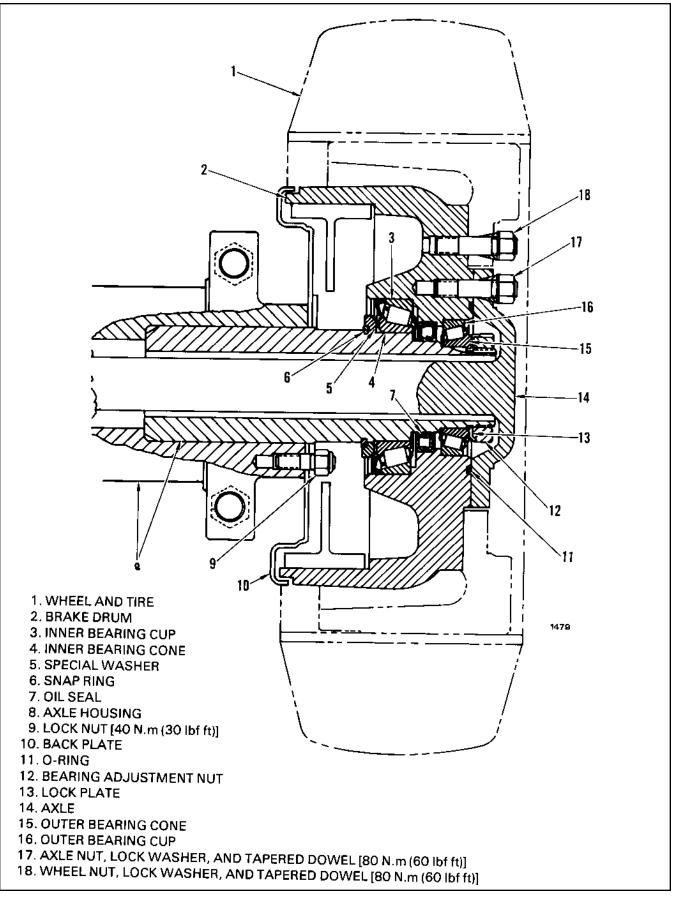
E20-30BS DRIVE WHEEL AND AXLE ARRANGEMENT
